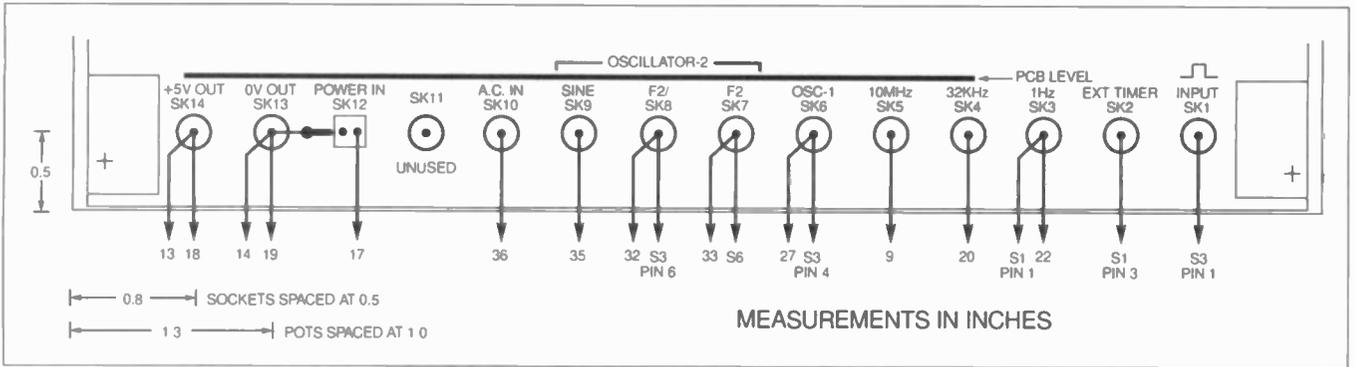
Front panel drilling and socket wiring details. The potentiometer fixing hole centres are one-inch (25.4 mm) above the centre line for the sockets and spaced as indicated.
